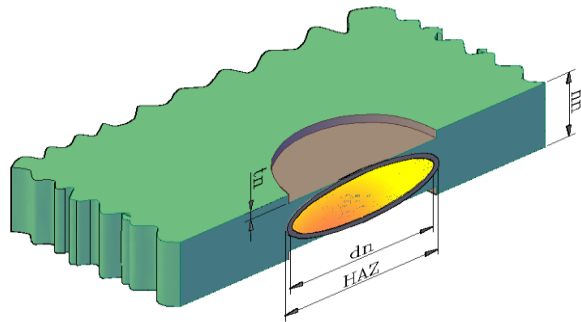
5. Weld nugget diameter sections of weldment .
